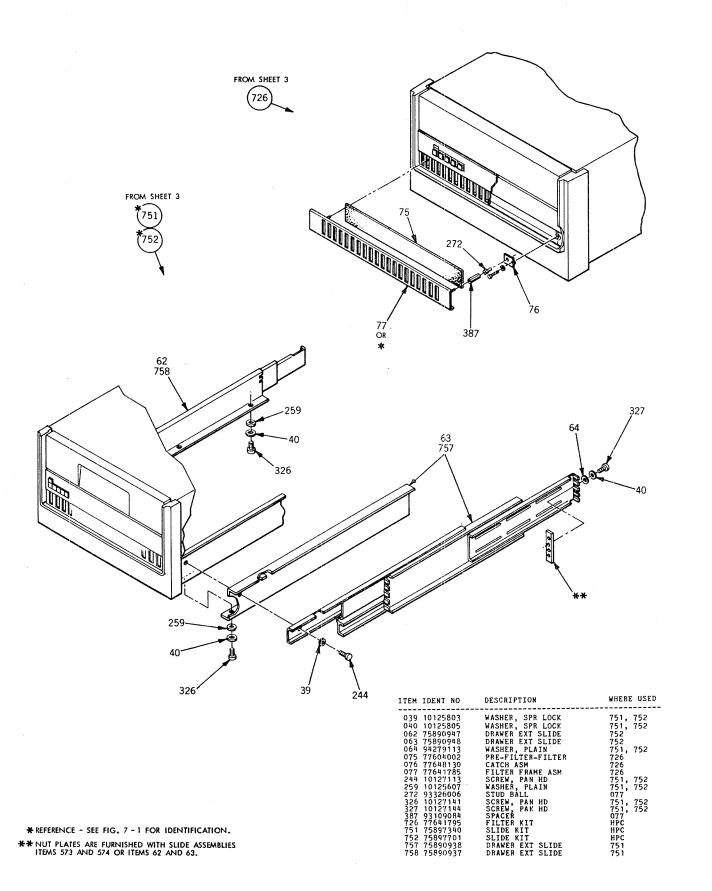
POWER SUPPLY ASSEMBLY
